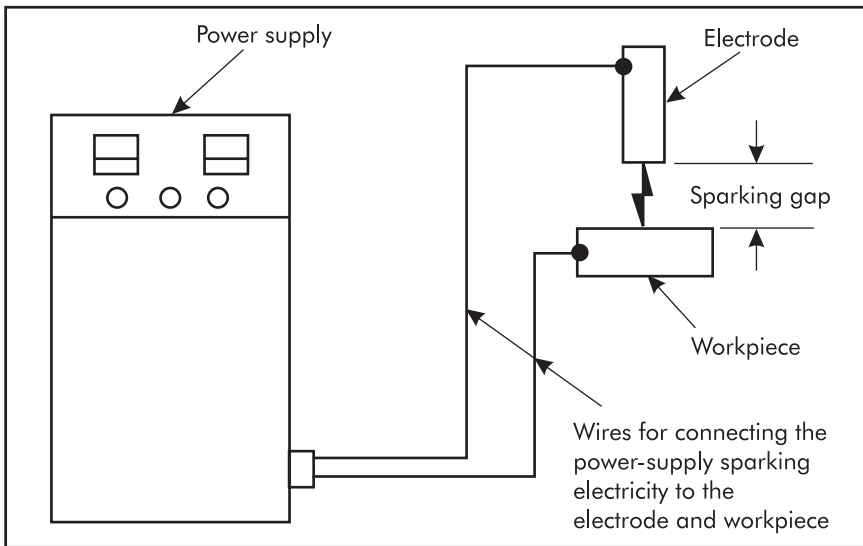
Electrical connections between power supply, electrode, and workpiece.
